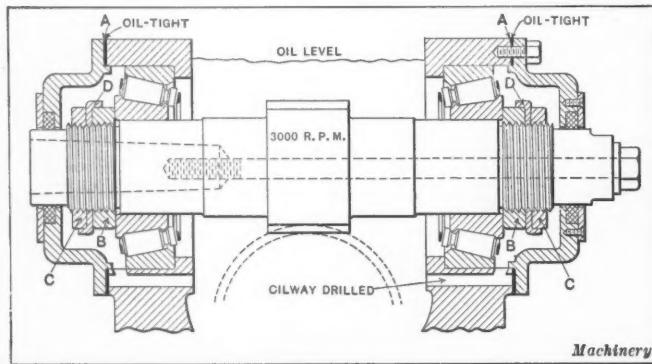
Thread Milling Machine Spindle with Adjustable Roller Bearings that carry Thrust of Spiral Gear and Pressure of Tool
